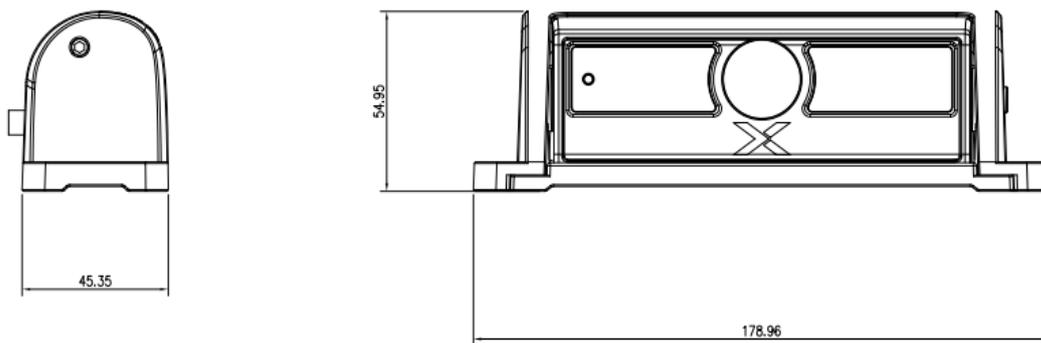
Dimensions of the Passenger Counter with the Side-Mounted Bracket (Unit: mm)
